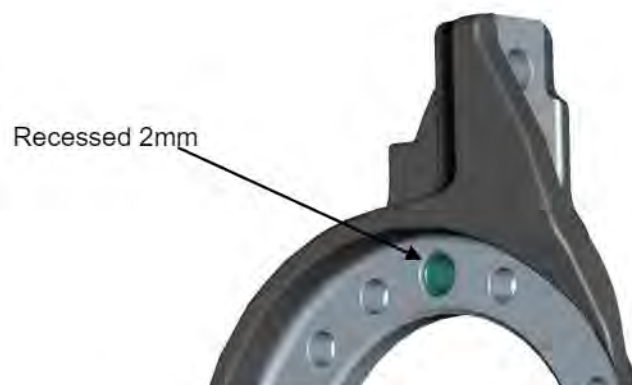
Adapter Plate with ABS Bushing Installed, Axle Flange Side Shown
